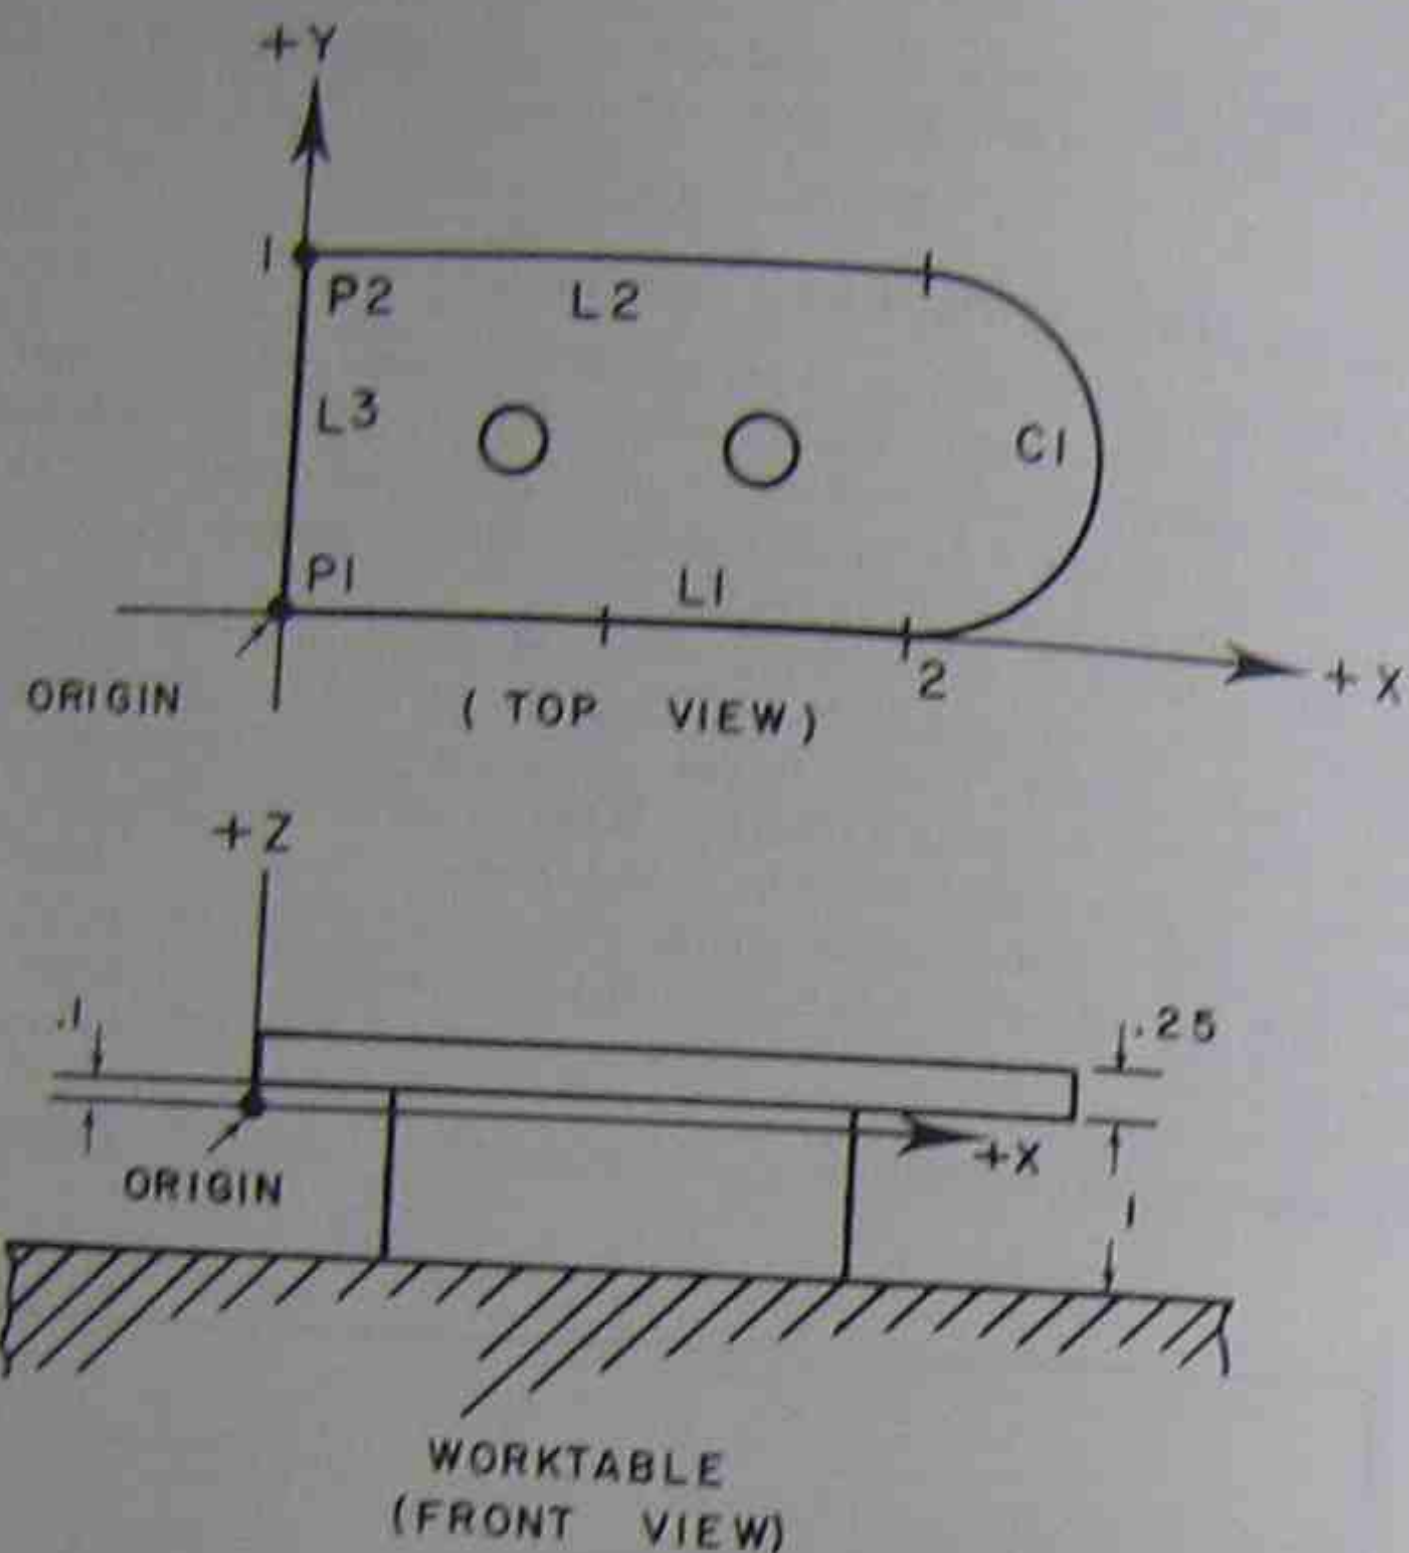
The part described in Fig. 5-14 is held above the worktable by a 1" riser block. The origin, or point where $X = 0, Y = 0, Z = 0$, is below the left-hand bottom corner of the part.
